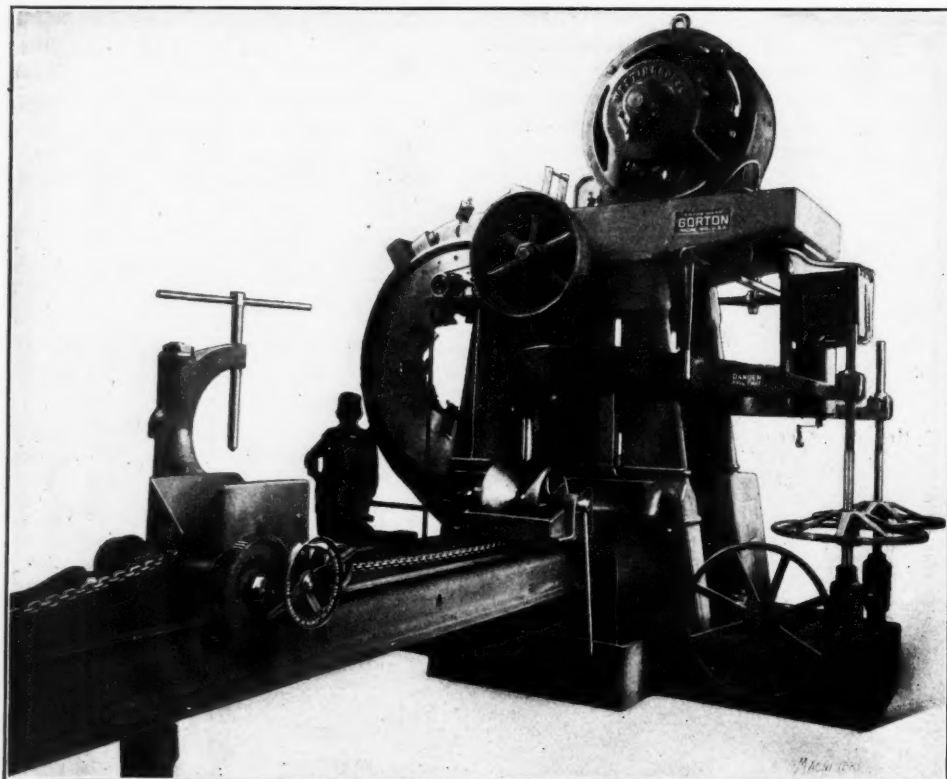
Gorton Sixteen-inch Cutting-off Machine with Drum raised to provide Access to Cutters
